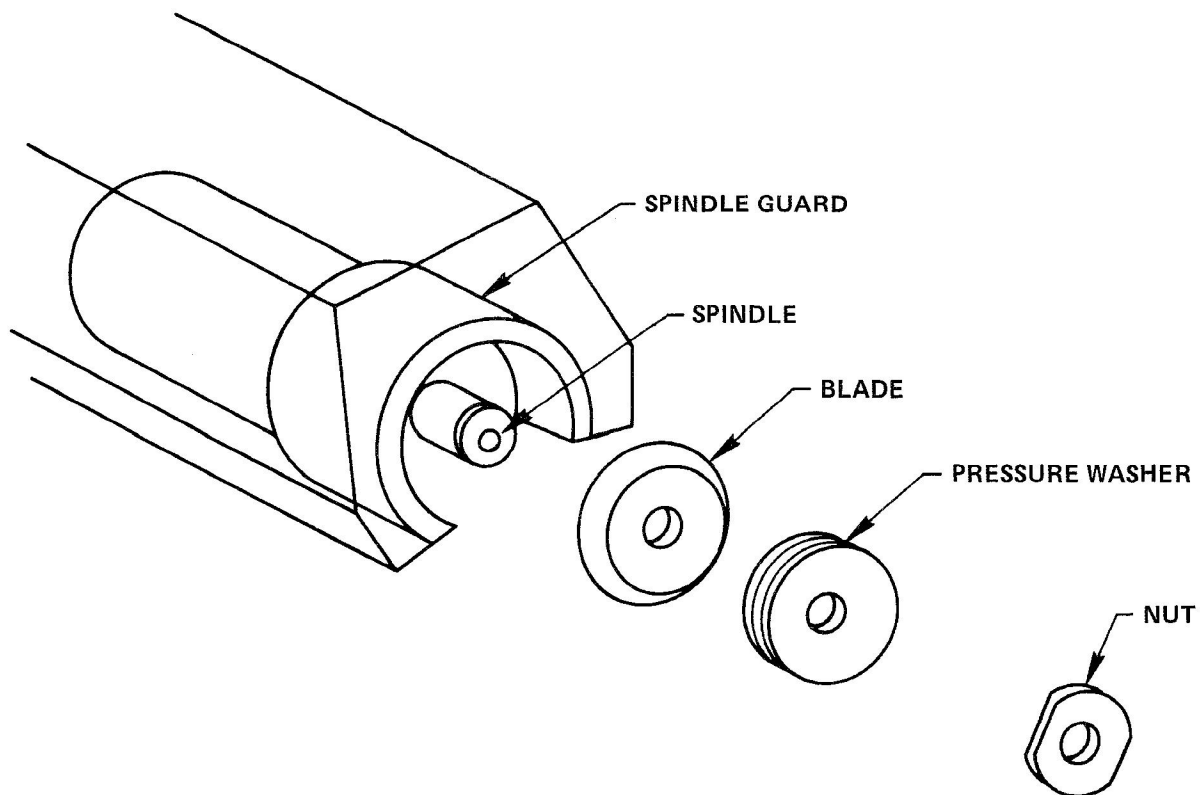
Assembly of Blade, Pressure Washer, and Nut.
